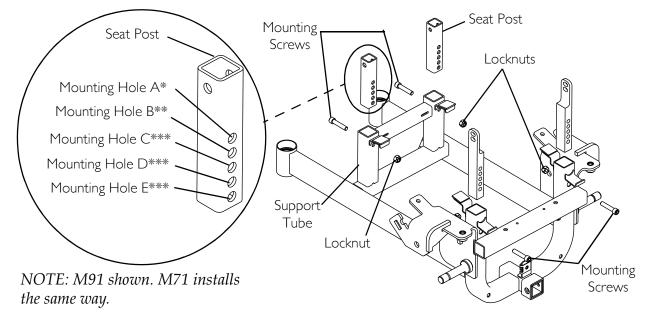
Installing the New Seat Mounting Hardware - Installing New Seat Mounting Hardware on M71 and M91
